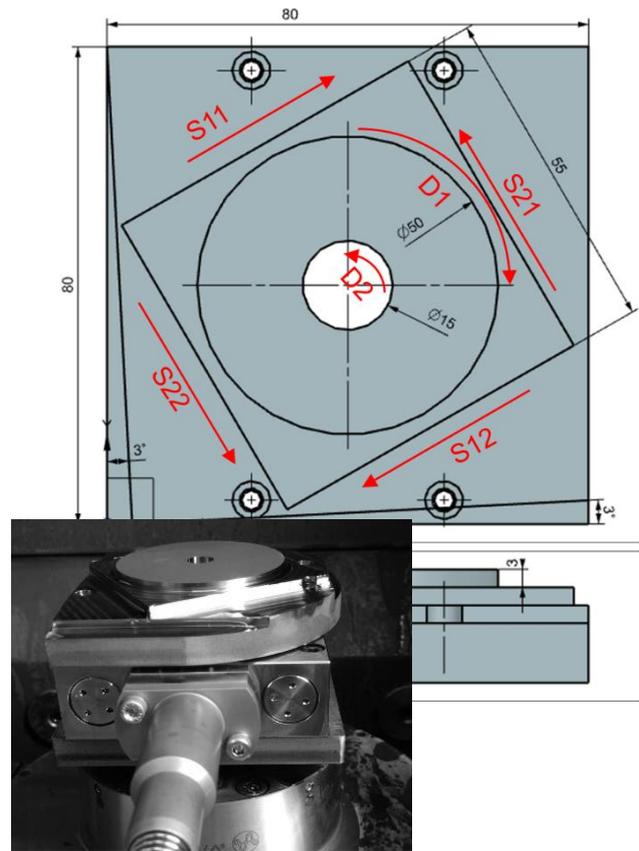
Machined workpiece, red arrows show the feed direction for the feature, inset: workpiece mounted on dynamometer on machine.
